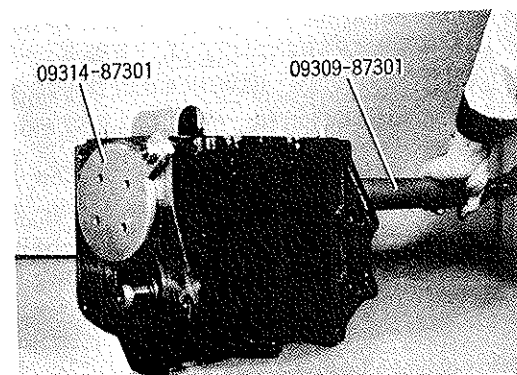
Press-Fitting of Output Shaft Rear Bearing
